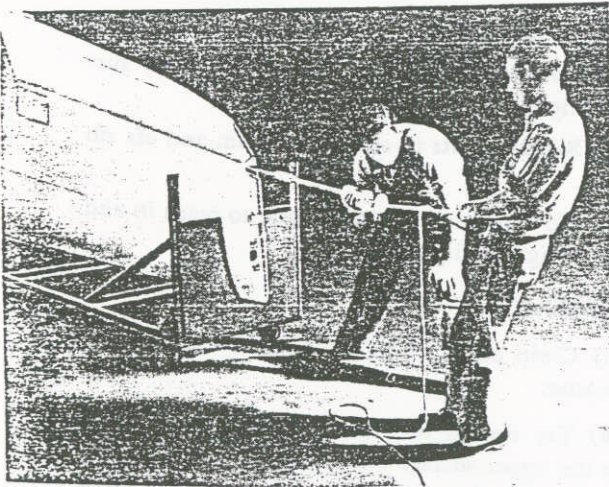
Withdrawing Aileron Hinge Wire Using Slide Hammer
